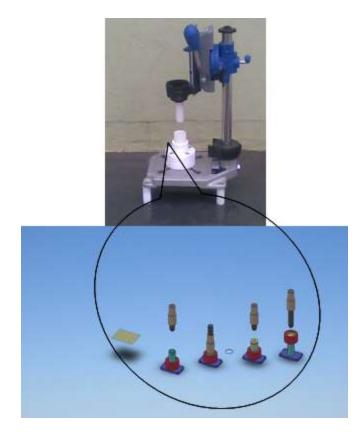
Prototype machine and design automation to manufacture spherical structure (Provisional patent application number 274/DEL/2011)
